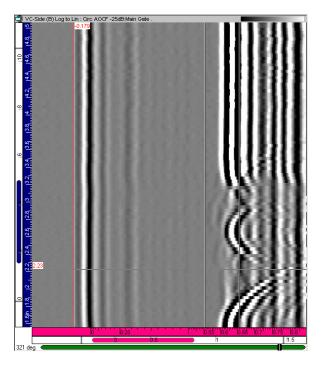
AOCF Data Showing Strong TOF Shape Indication in Weld Region of Nozzle 19
